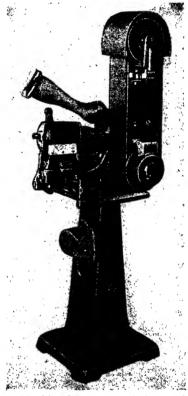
Production Machine Company surfacing machine using an abrasive belt running over a supporting metal plate behind the belt. The work to be ground is held against the belt and can be surfaced at a rapid rate.
